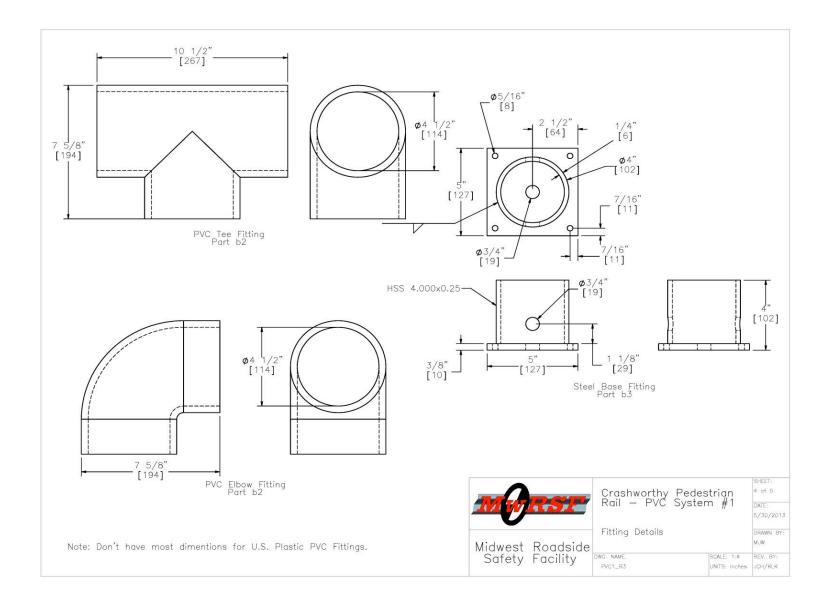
Modular PVC Rail, Design Concept PVC1 (Sheet 4 of 5)
